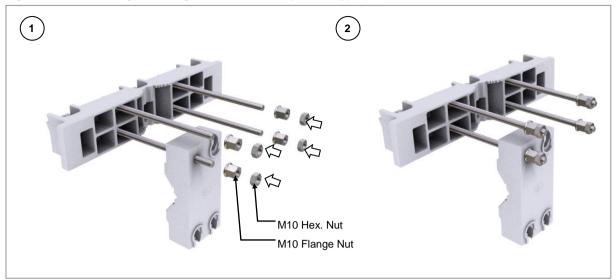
Assembling Mounting Bracket Assembly_Pole Type (2)
